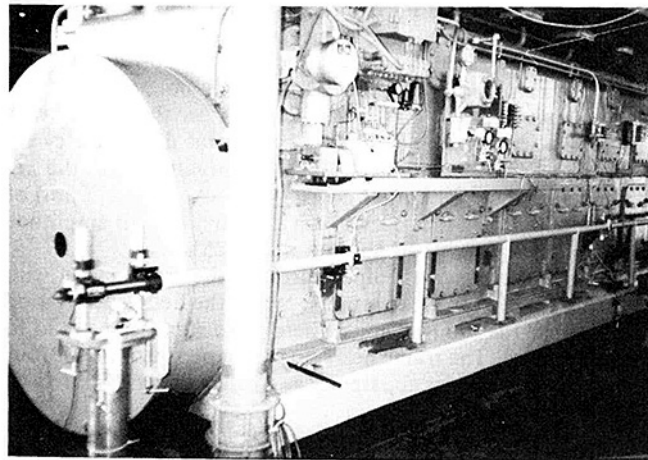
Laser gun and target with shield tubes (chock mount test)
